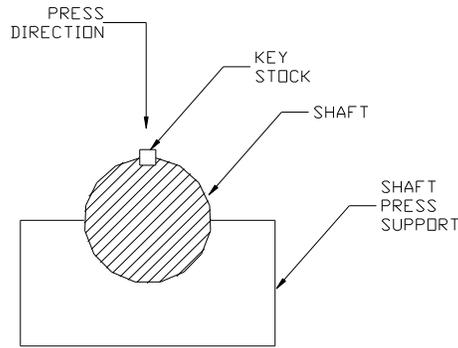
SHAFT KEY PRESS SUPPORT FIXTURE
